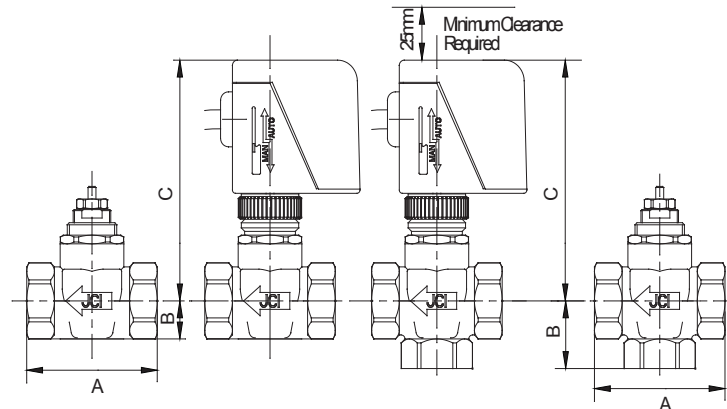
VA-7010 Actuated VG4000 Series Valve Dimensions, in. (mm) (Refer to Table 3)
